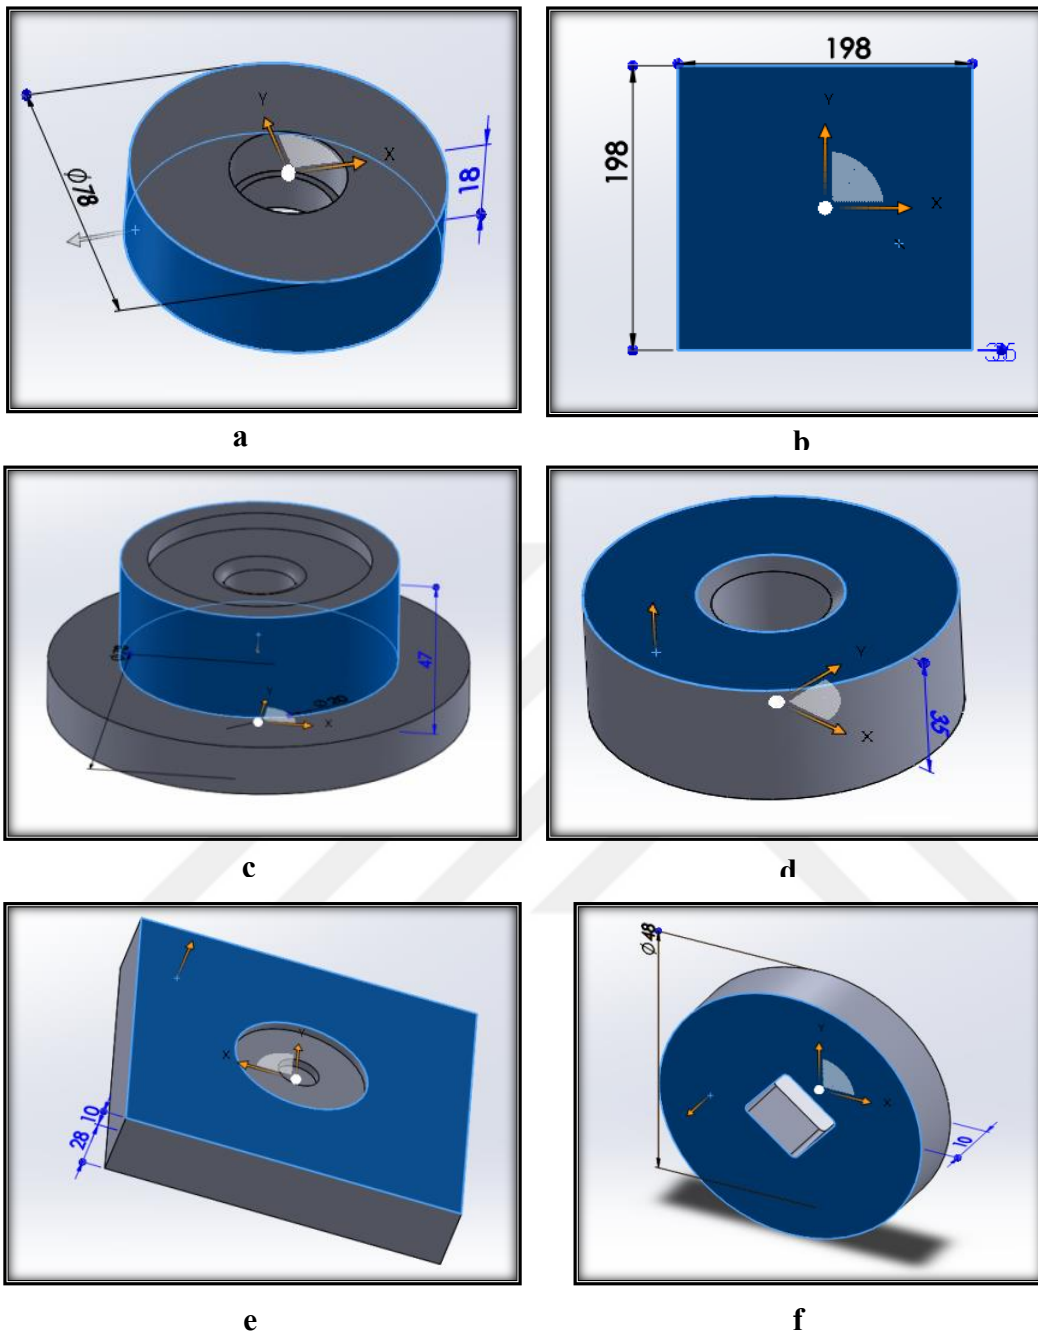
Parts of the die: (a) Upper punch holder; (b) Top and bottom plate; (c) Lower holder; (d) Lower billet holder; (e) Ejector; (f) Bottom plate
